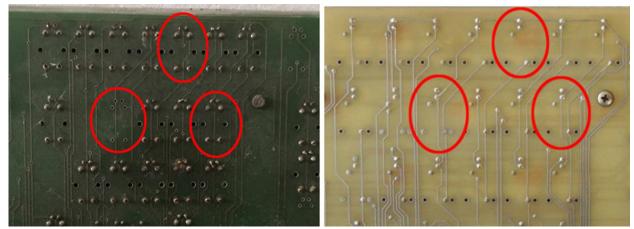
Comparison between the rear PCB tracks on the front panel assembly of the WJ-5JK receiver (left picture) and of the stock WJ-8718A/MFP (right picture).
